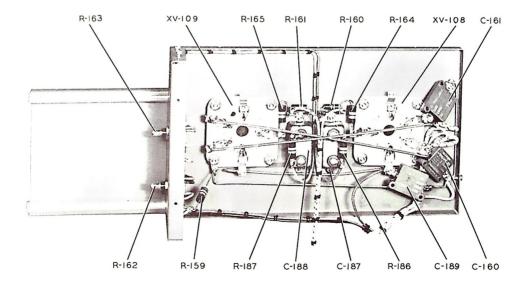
Driver Cabinet Audio Chassis, Bottom View
